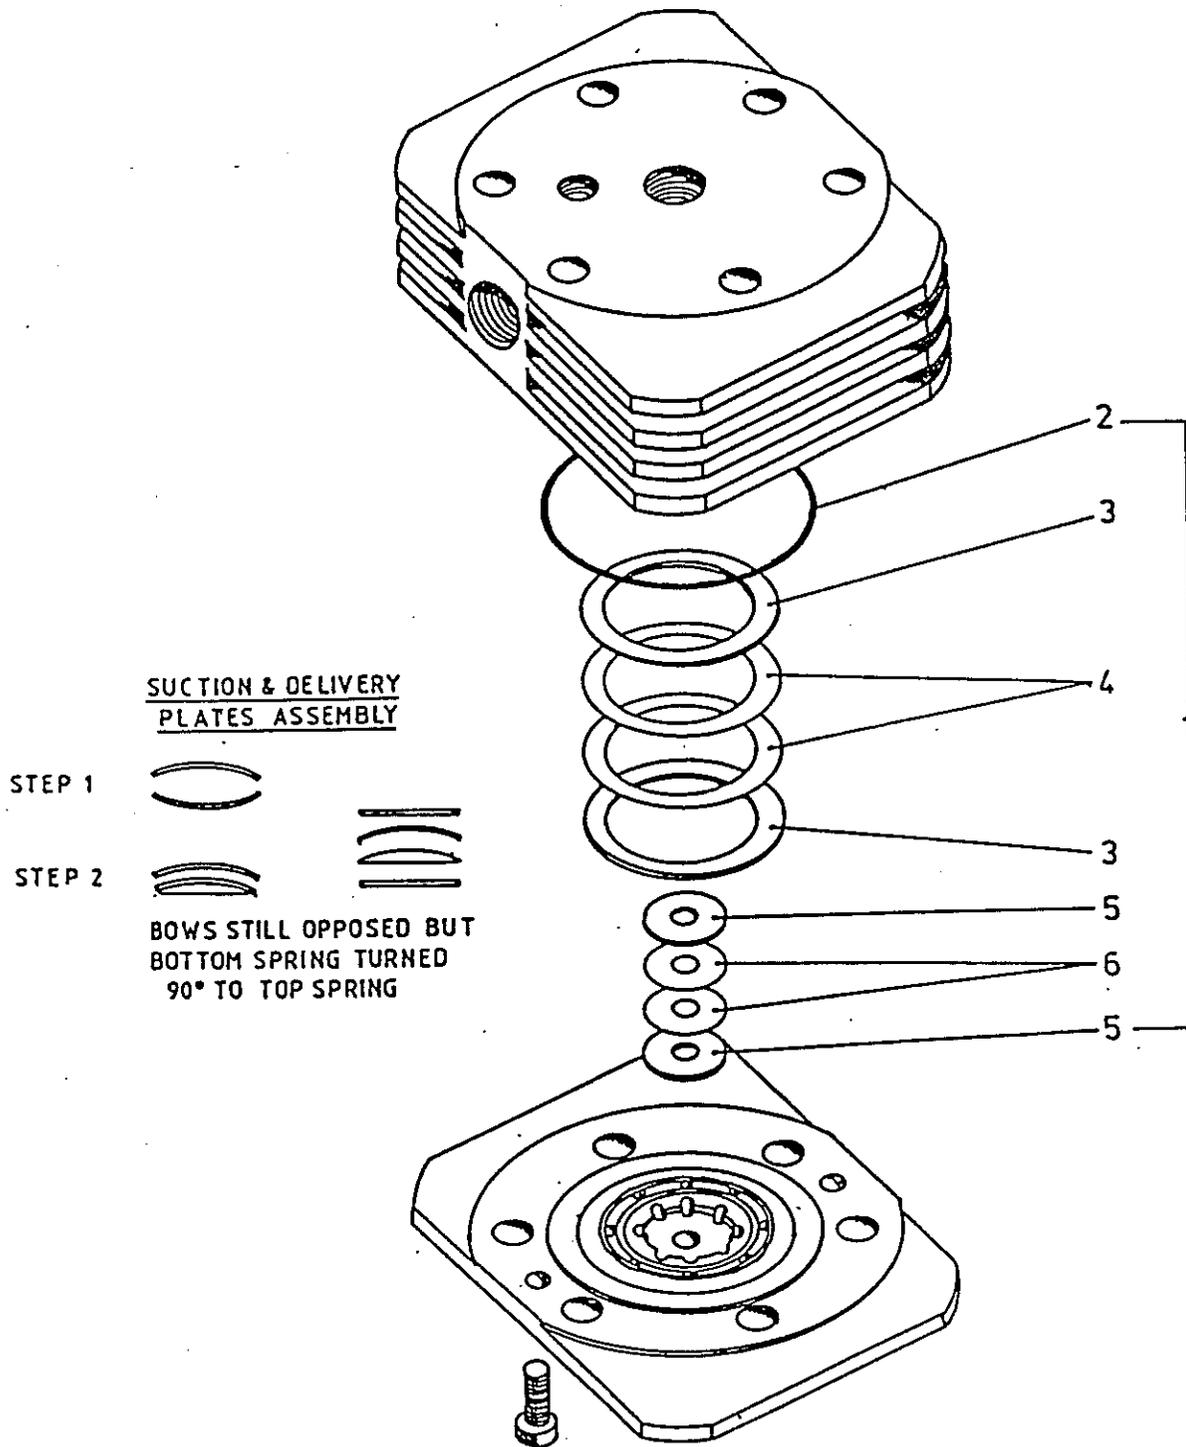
Valve, 2nd Stage, Inlet-Discharge
